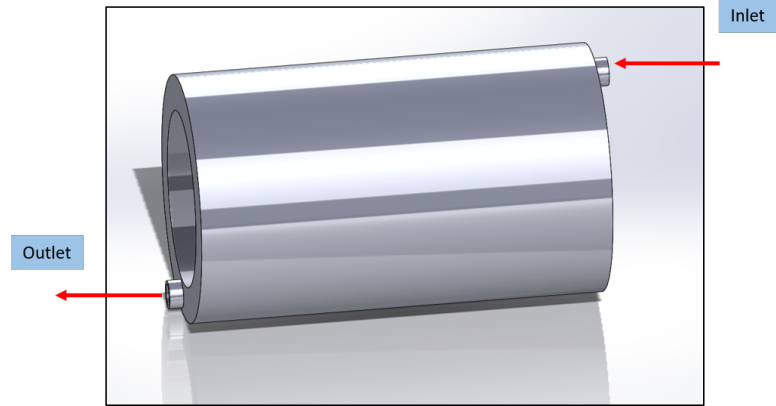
Side view of cylinder assembly in Design A with internal cooling path.
